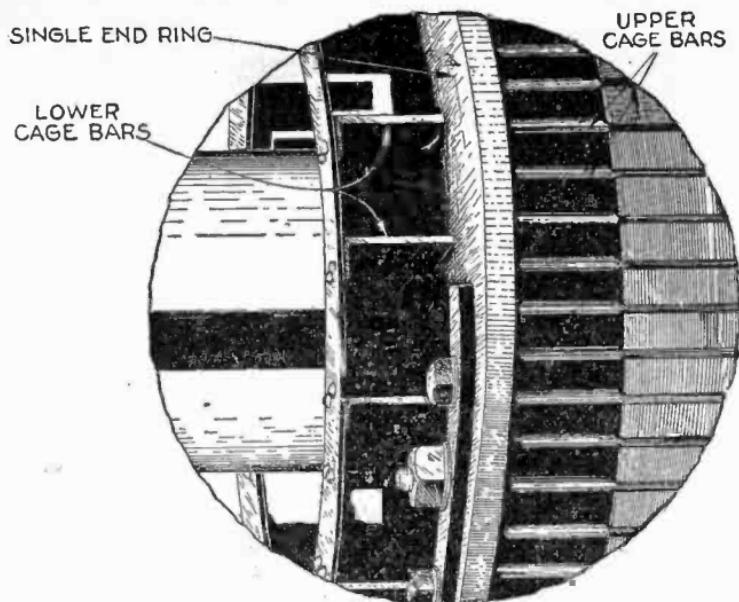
,763.—Westinghouse *single end ring* construction for double squirrel cage armature.
